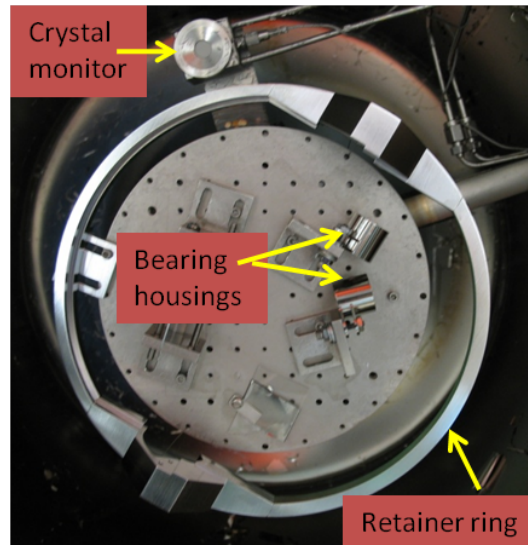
Photograph of the mounting scheme used to coat the 2007 flapper retainer ring and source cylinder faces. The ring and cylinder was held with thin gauge SS wire through screw holes in the part and mounting plate so as to not obstruct the evaporant flux. The bearing housings that previously failed the LN₂ cold test were repolished, recleaned, and recoated during these depositions.
